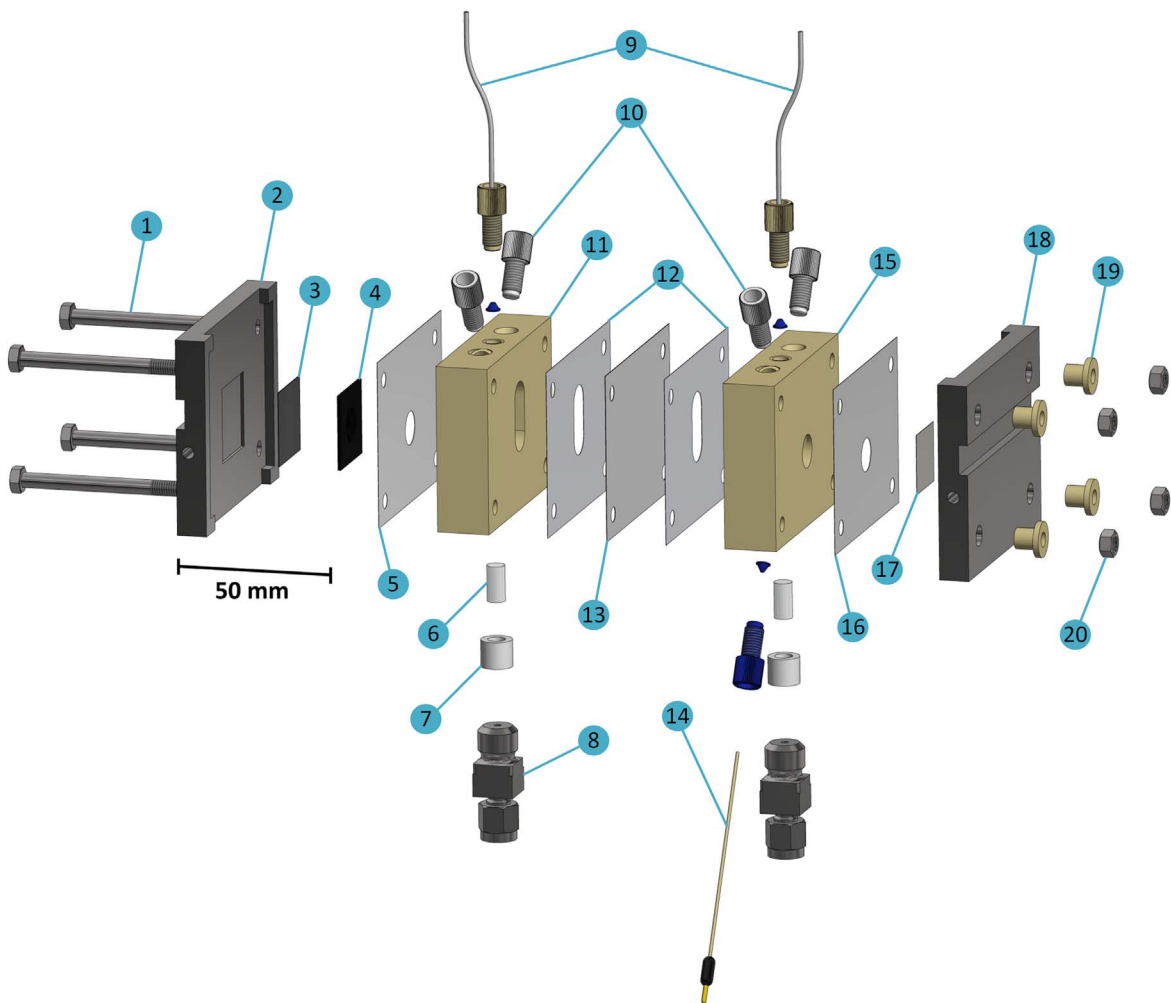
Technical drawing of the cell assembly, consisting of four M5 screws (1), the cathode current collector (2), a piece of graphite foil (3), the glassy carbon plate with the drop-casted working electrode (4), PTFE gaskets (5, 12, 16), porous glass frits (6), PTFE frit holders (7), input line adapter screws (8), product output lines (9), PTFE plugs (10), the working electrode compartment (11), a piece of Nafion XL membrane (13), a leak-free Ag/AgCl reference electrode (14), the counter electrode compartment (15), the platinum counter electrode (17), the counter electrode current collector (18), and the PEEK inserts (19) and nuts (20) to close the assembly.
